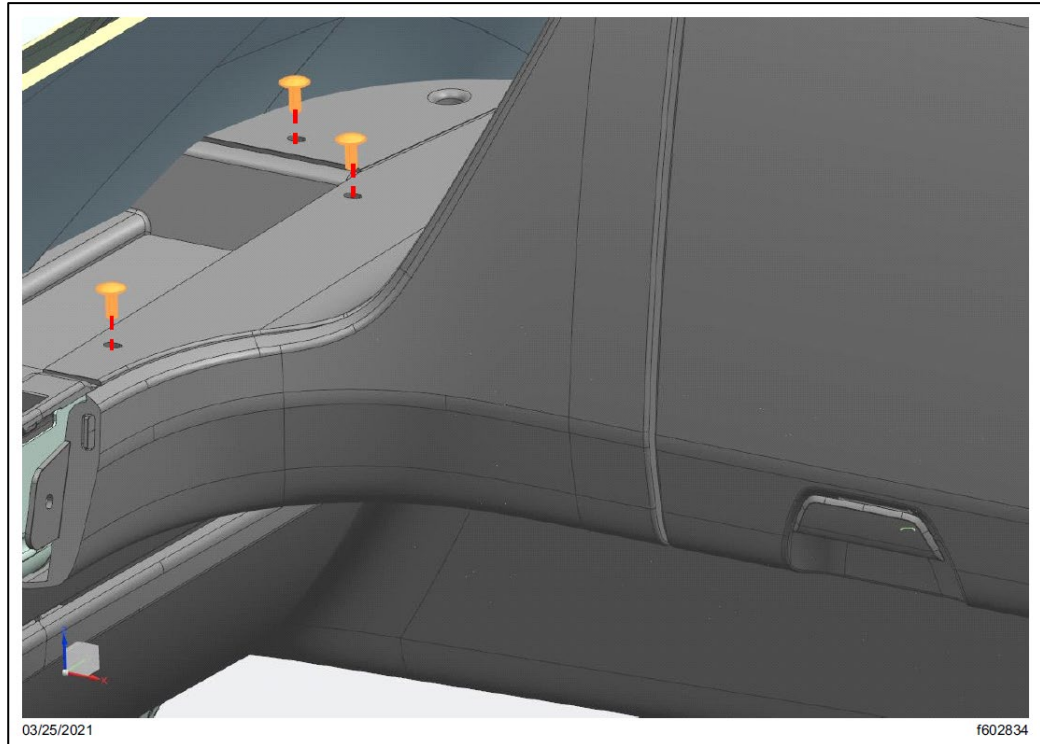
, Fasteners That Attach the RH Overhead Storage Assembly to the Storage Shelf Flanges
